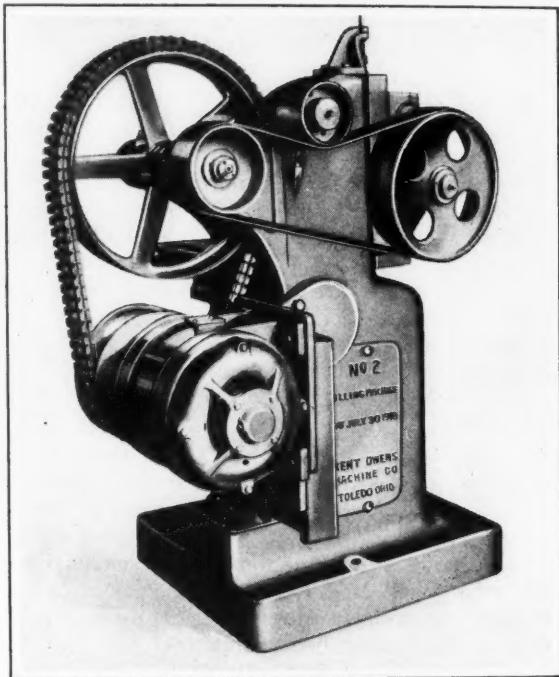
Variable-speed Drive of Milling Machine Illustrated in Fig. 1
